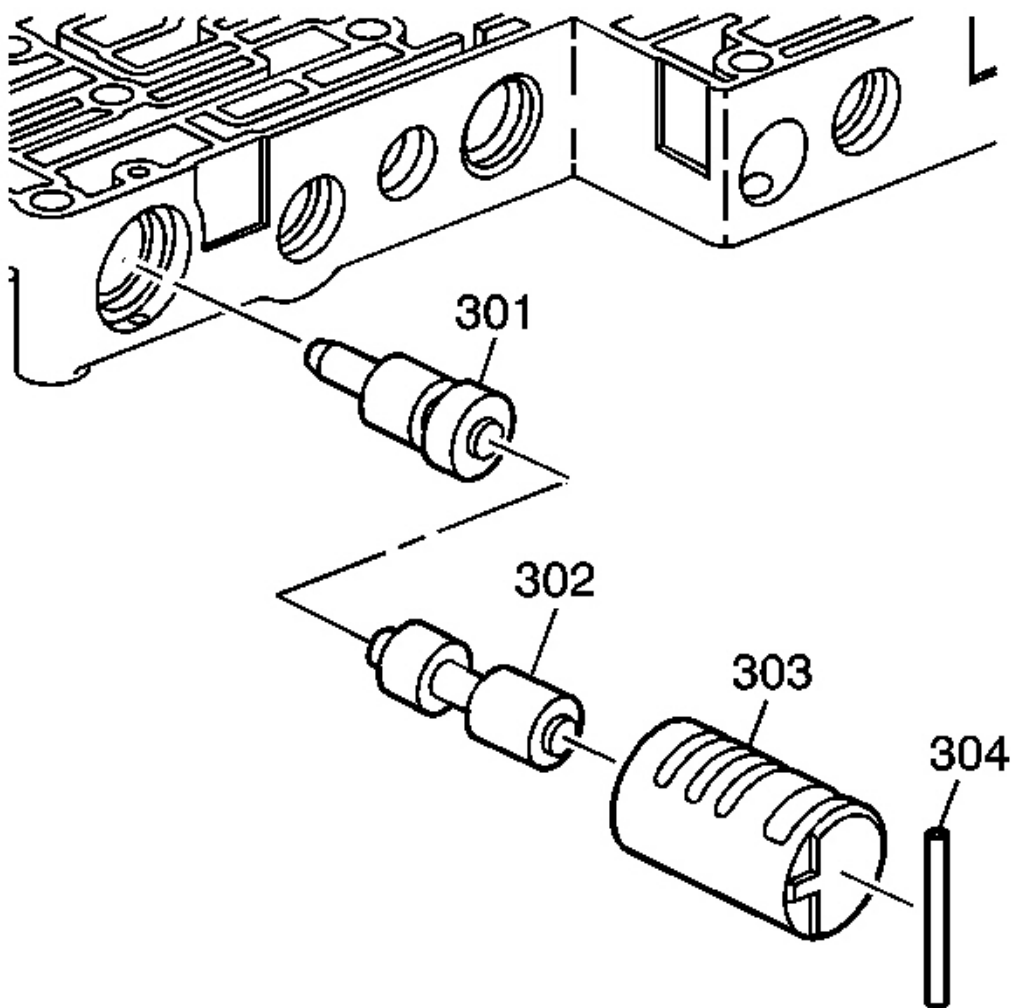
Identifying 1-2, 3-4 Accumulator Valves
